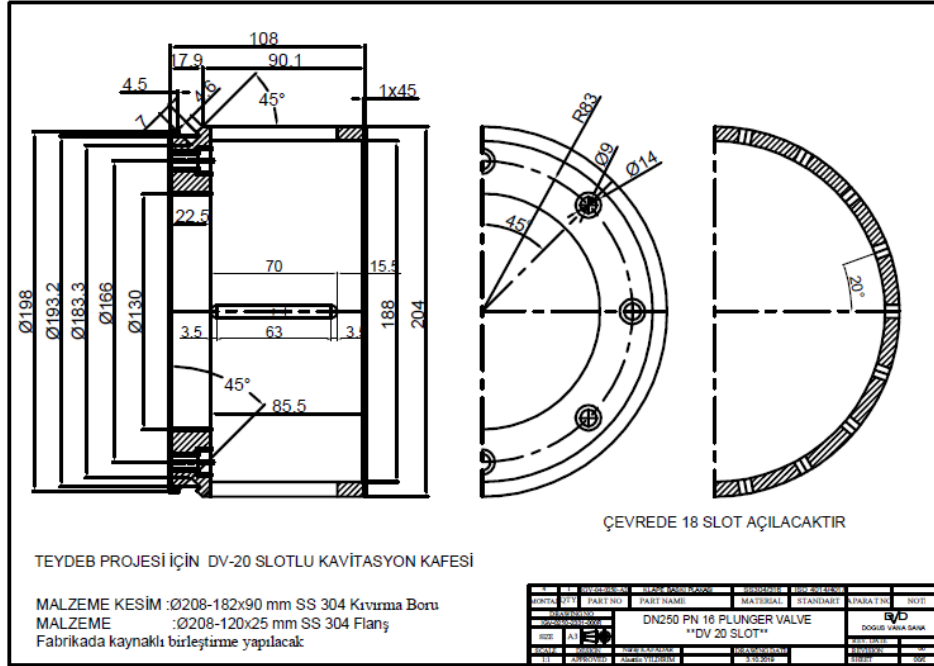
Technical Drawing DV 20 Slot of DN 250 Plunger Valve
